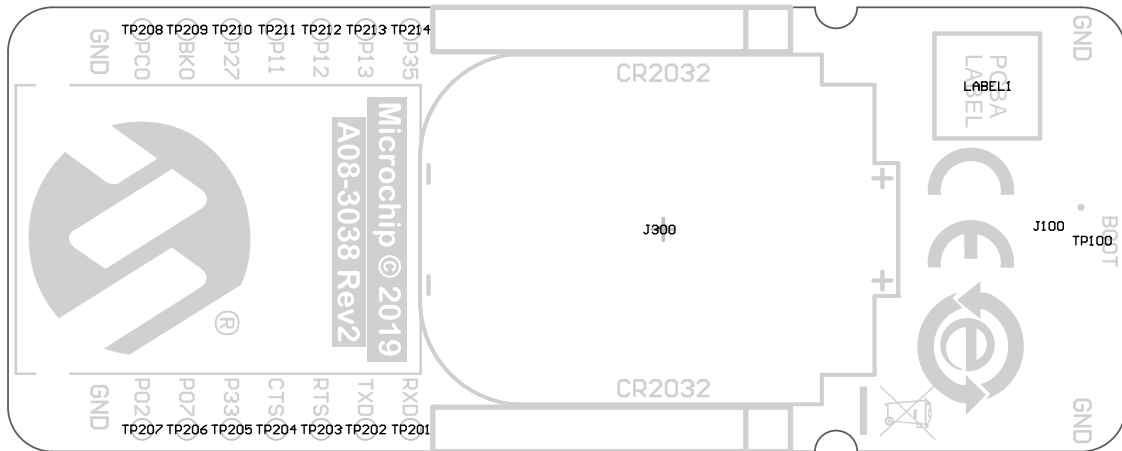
AVR-BLE Assembly Drawing Bottom
